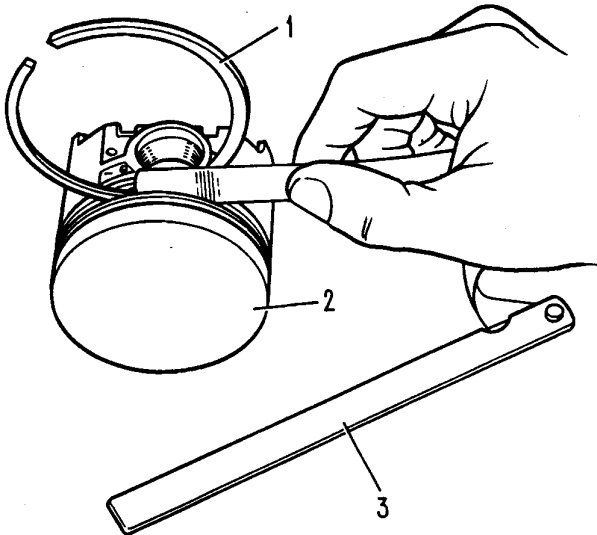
Checking Piston Ring Side Clearance: 1 - piston ring; 2 - piston; 3 - set of feeler gauges
